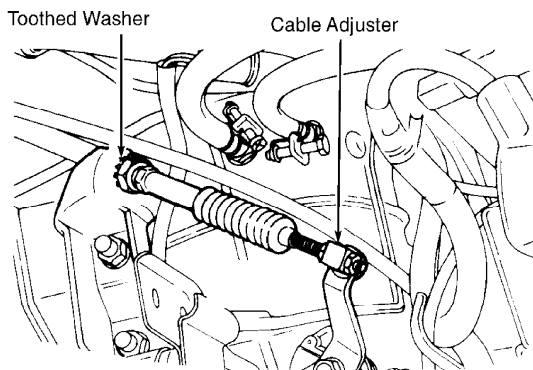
Adjusting Shift Cable (Pickup & Ram-50)
